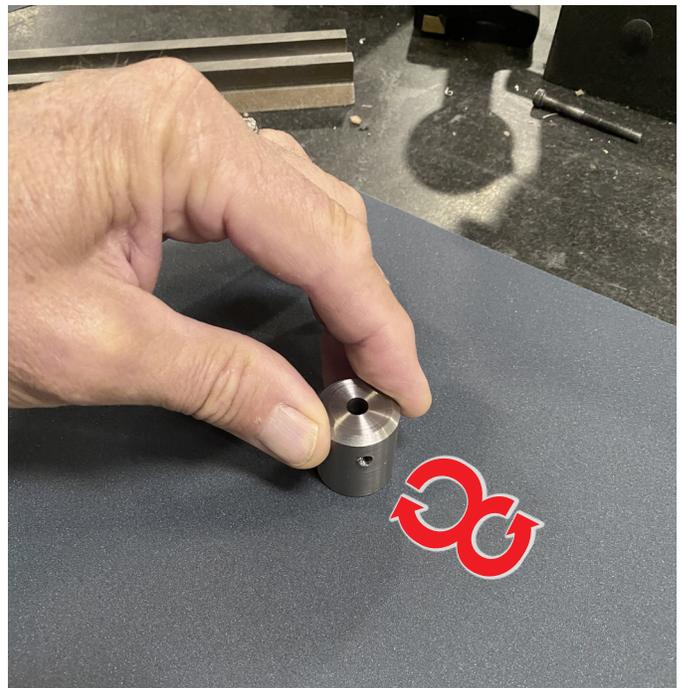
Light sanding in a figure-8 motion holding the end mill holder flat and square to the paper.
